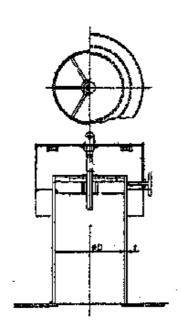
Reinforcement by bracket of Air pipe and Ventilator
